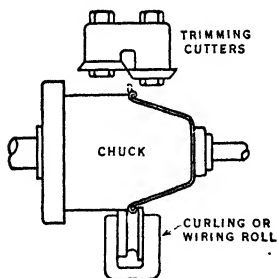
Trimming in the proper direction followed by curling as performed on a spinning lathe.
